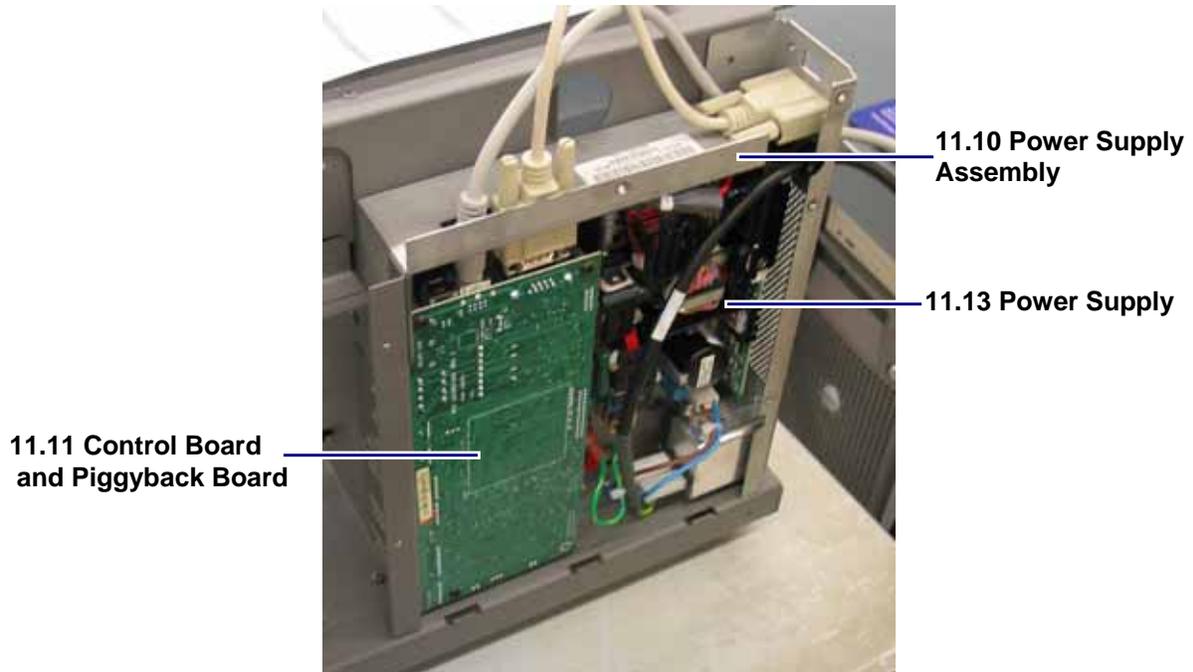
Amigo II and AutoPrinter II Power Supply Assembly Interior View
